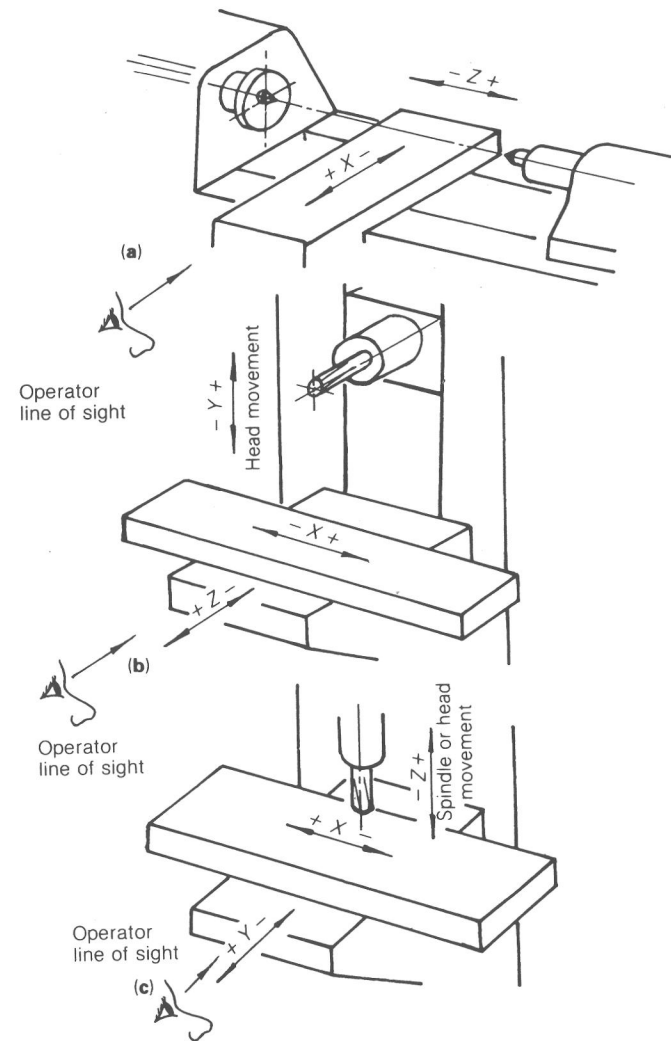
Identification of slides and direction of the slide movement on common machine tools: (a) center lathe (turning center), (b) horizontal milling machine (horizontal machining center), (c) vertical milling machine (vertical machining center).
